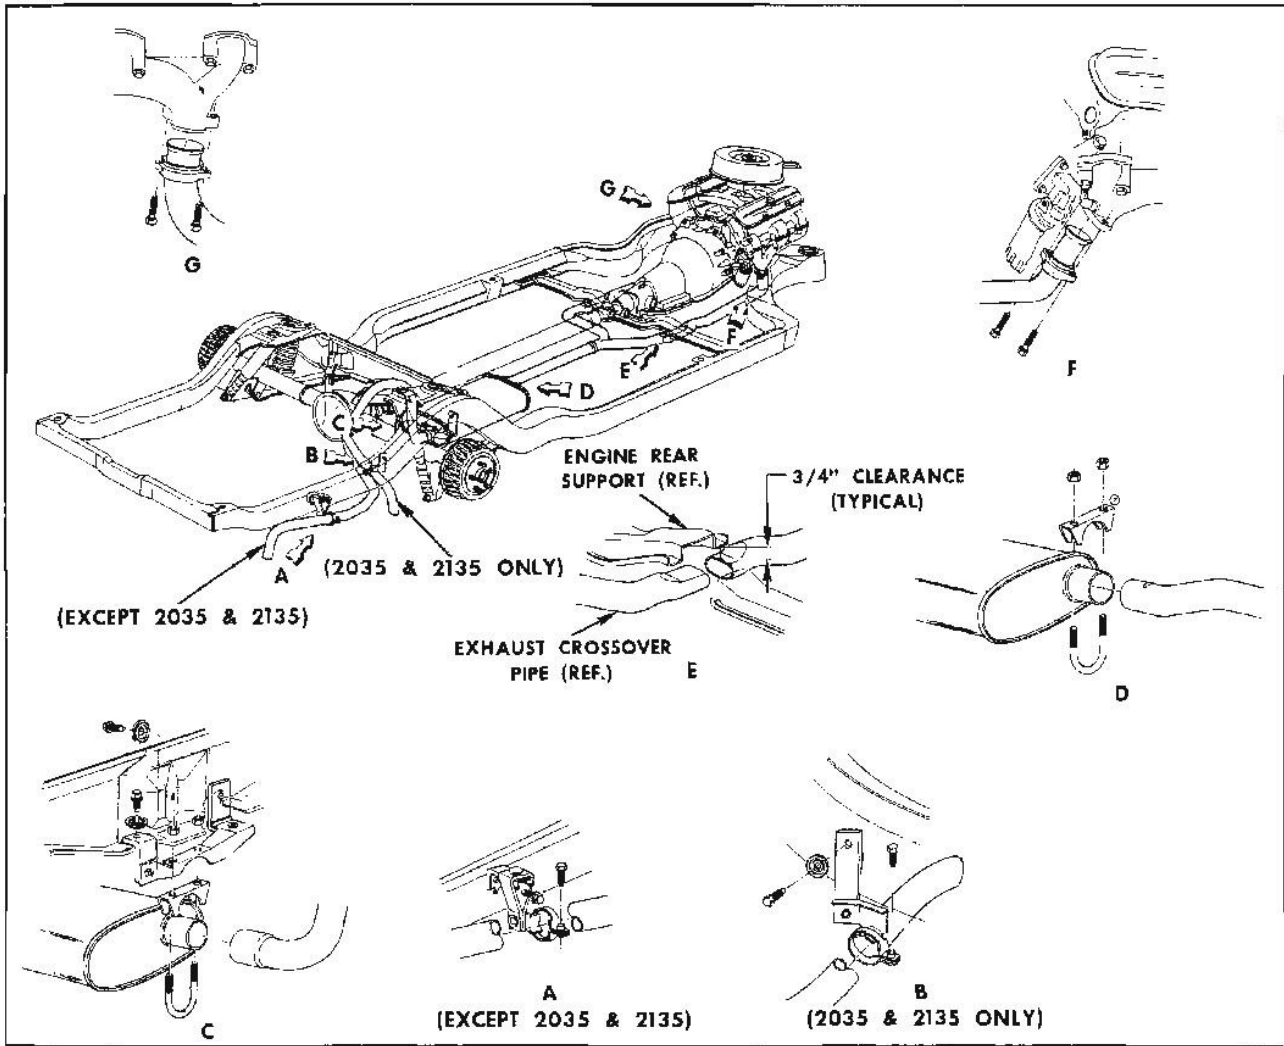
Exhaust System - Eight Cylinder Engine, Single Exhaust
